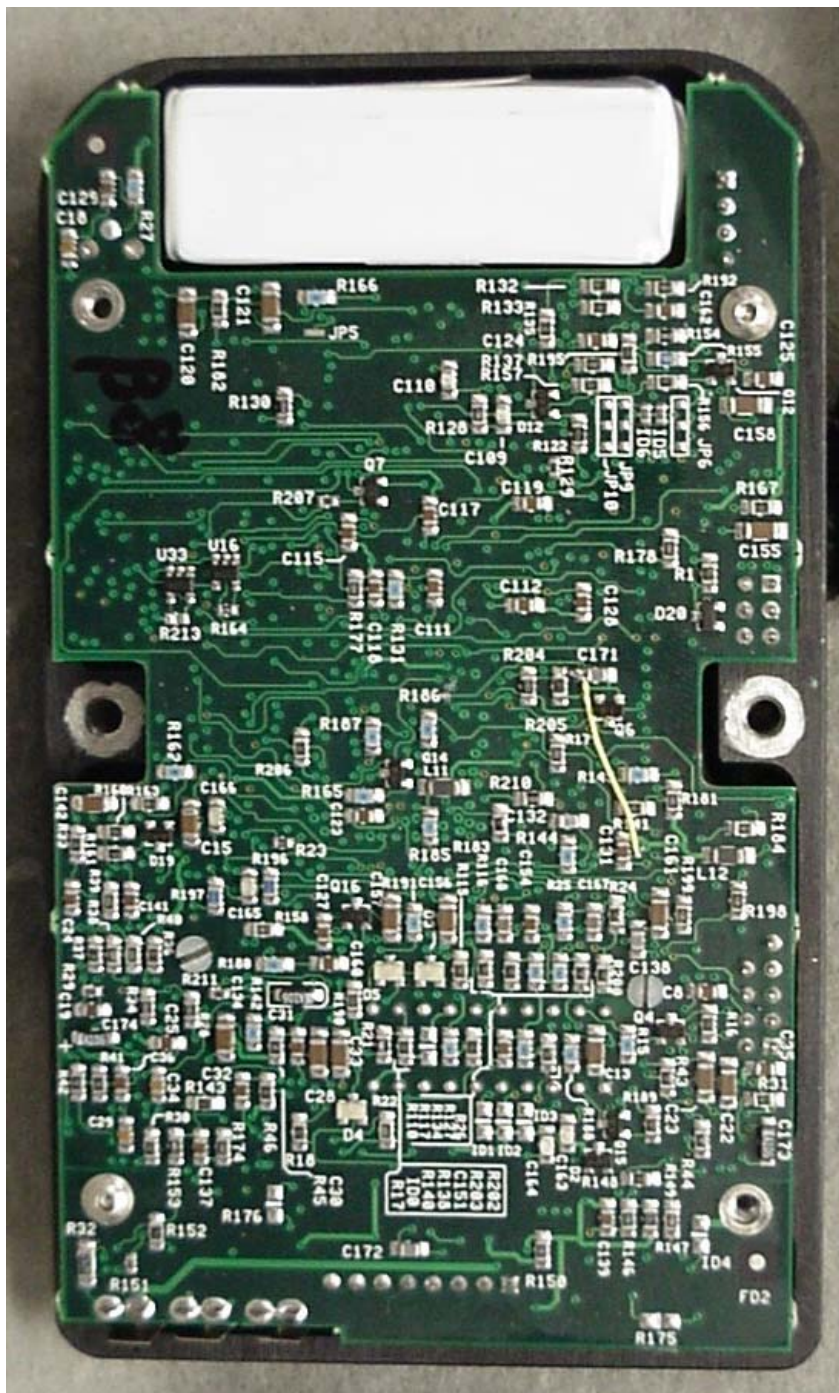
EUT, Bottom View of Laser Alignment Head CPU Board
